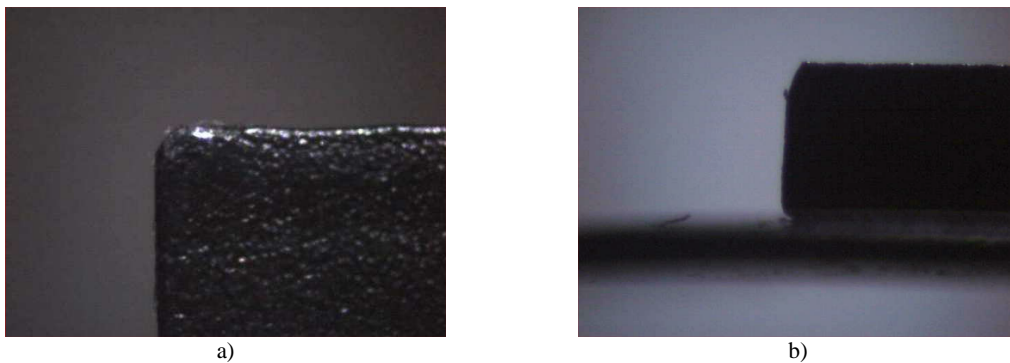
Rib analysis of the POM parts moulded on the MS01 moulding block
